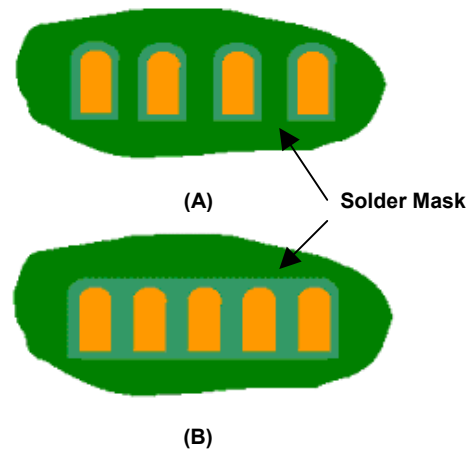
Solder mask for perimeter lands a) for 0.5mm and higher pitch parts, b) for 0.4mm pitch parts
